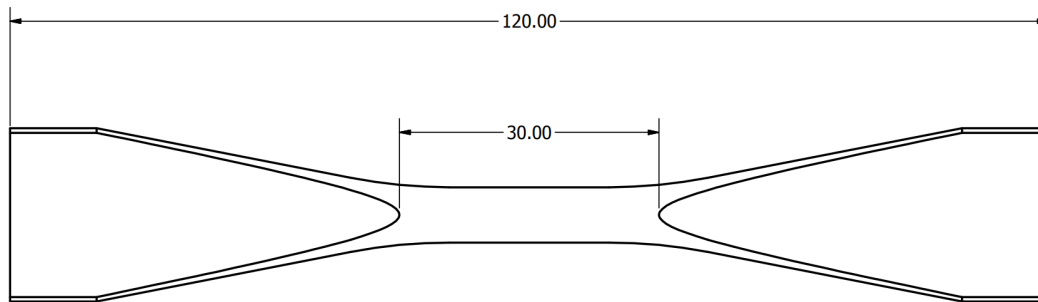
DIMENSIONS OF TEST SPECIMEN FOR SHAPE & SCALE TESTING
